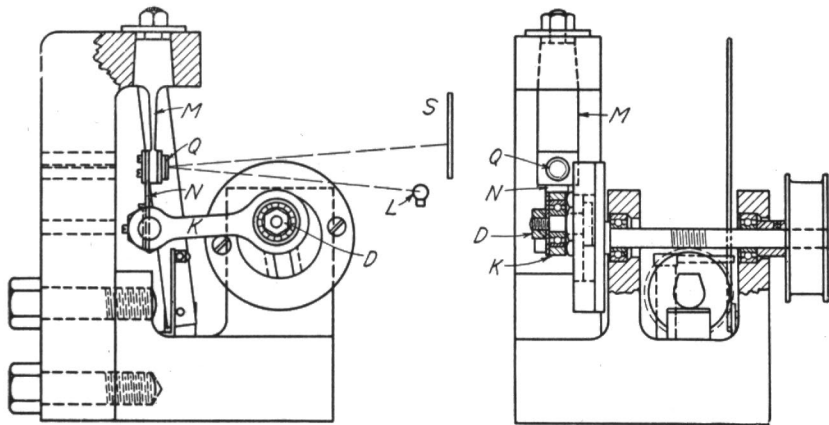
SPECIMEN FOR ROTATING-SPRING FATIGUE TESTING MACHINE
